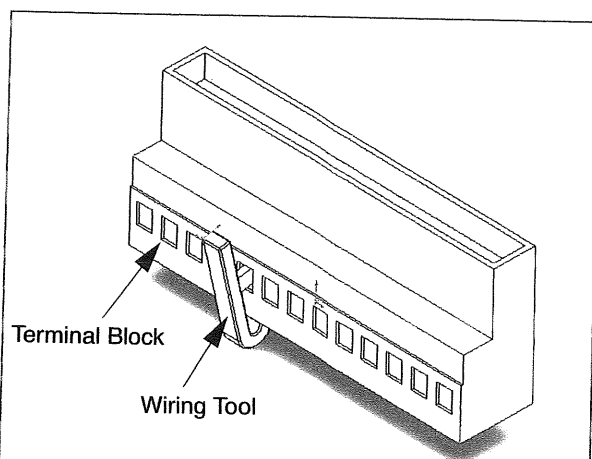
Using the Wiring Tool on the Terminal Blocks
